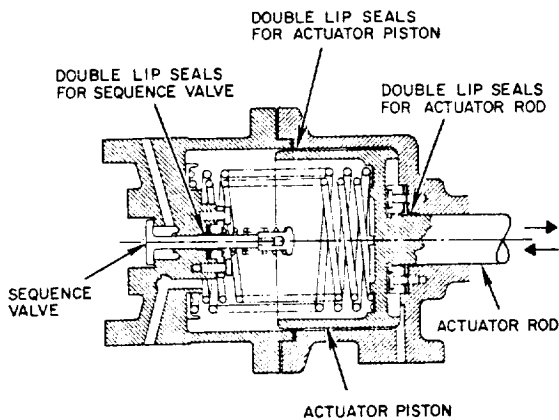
Lip seals for piston-type actuators. Double lip seals seal pressures both ways.
